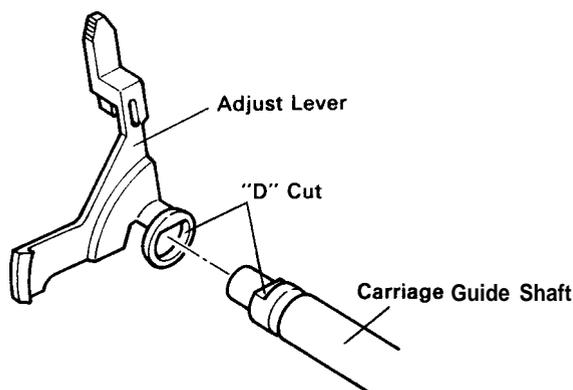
Carriage Guide Shaft and Head Adjust Lever
